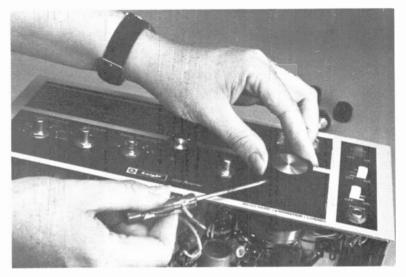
Using 3/32" blade screwdriver to tighten knob set screws.
